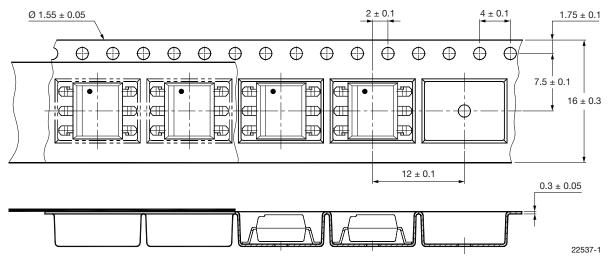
Tape and Reel Drawing, 1000 Units per Reel
